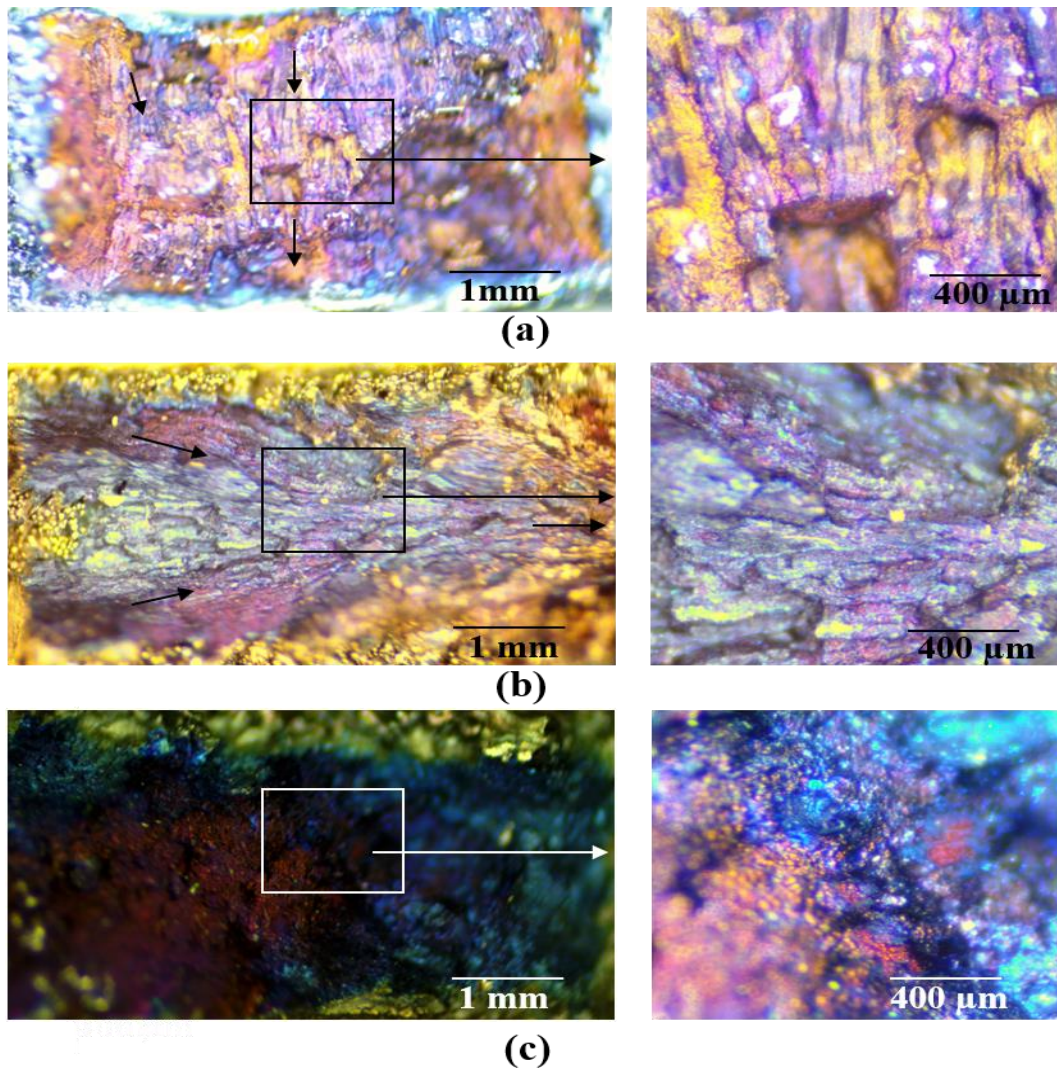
Optical microscopy images taken from fracture surfaces of EBM Ti6Al4V parts tested at 600 °C temperature, (a) Flat-built, (b) Side-built, and (c) Top-built sample.
